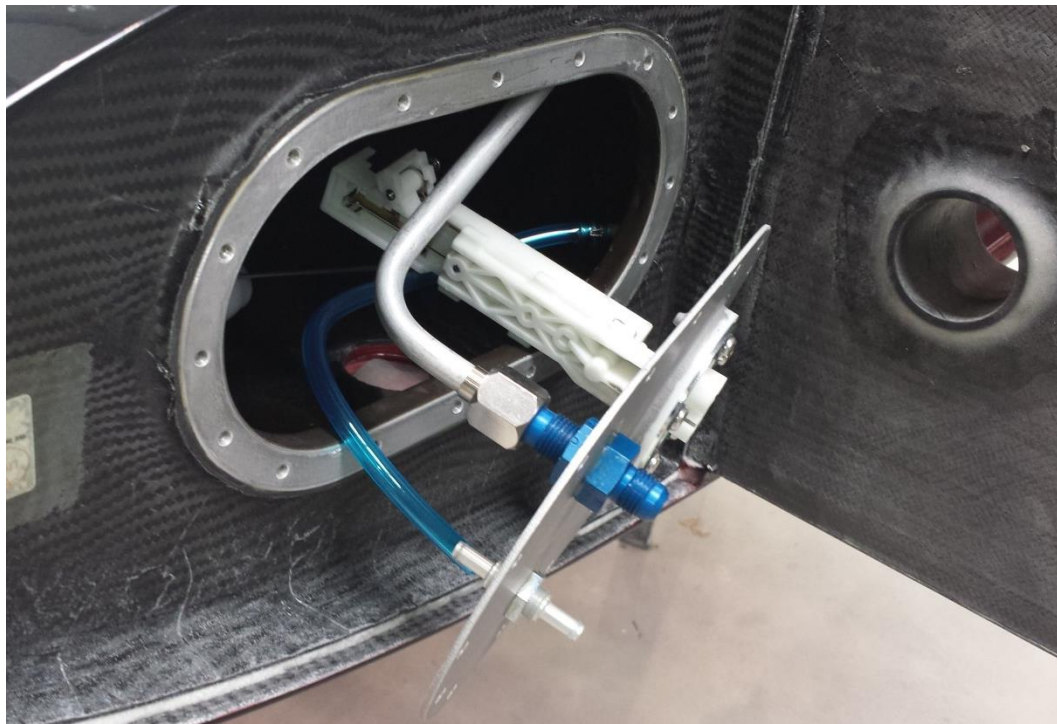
Assembly of tank plate (LH) Note: Wing is upside down.
